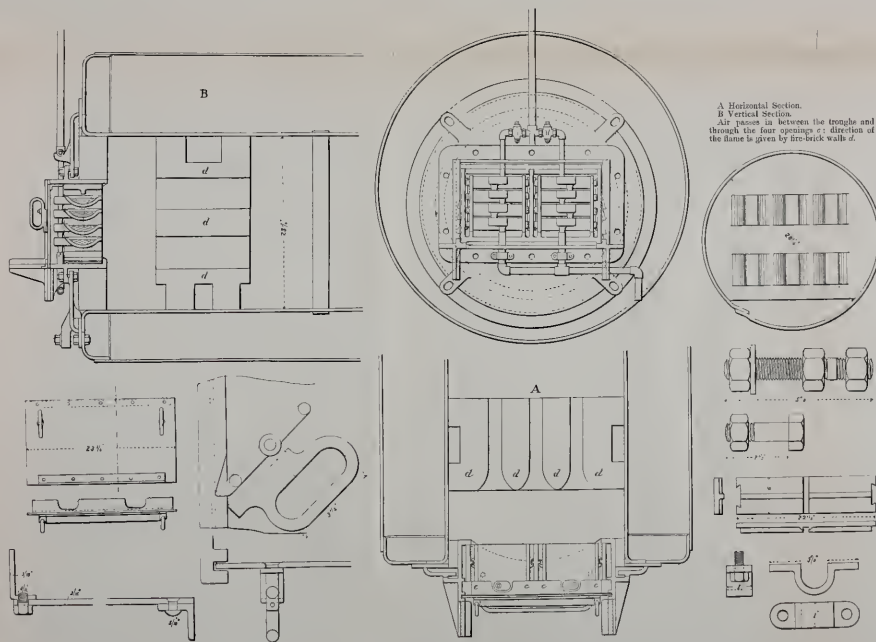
Nobel Trough Burner applied to Horizontal Steam Boiler.
